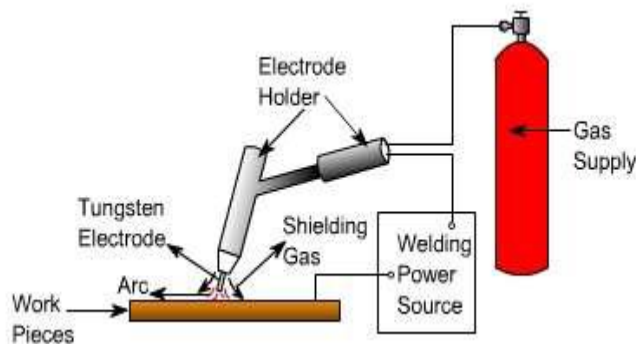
Schematic Diagram of TIG Welding.
